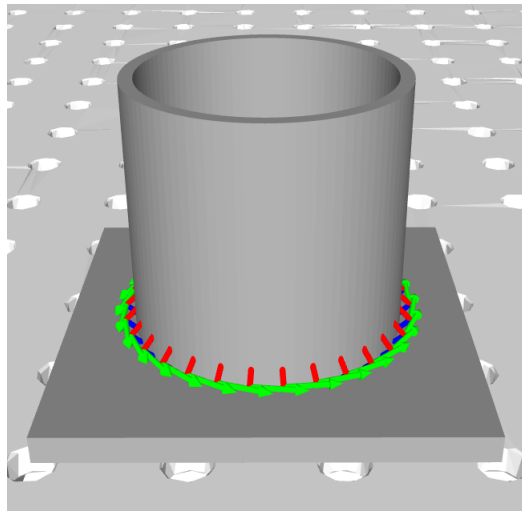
Workpiece with trajectory, placed on the welding table.
